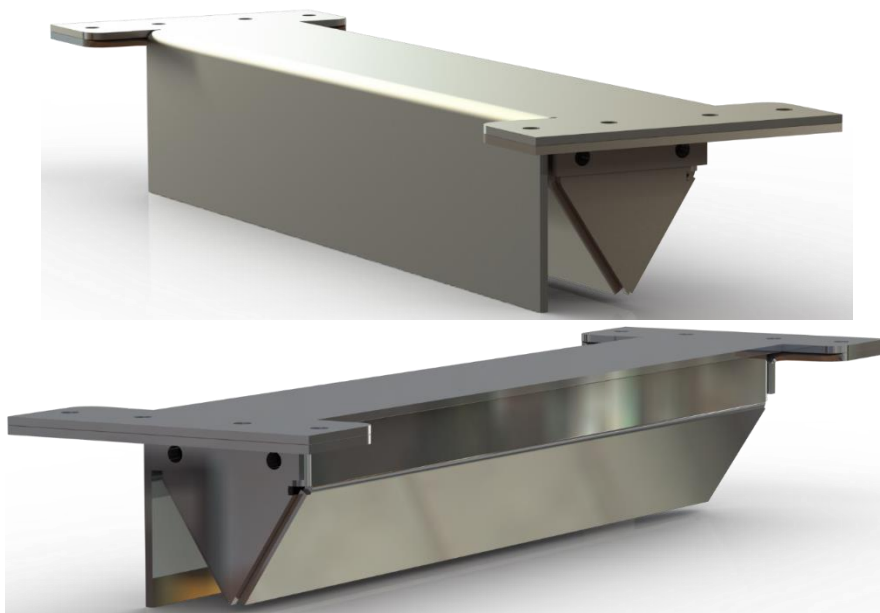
Hopper design in sheet metal, with front and back view, and integrated spreader blade attached.
